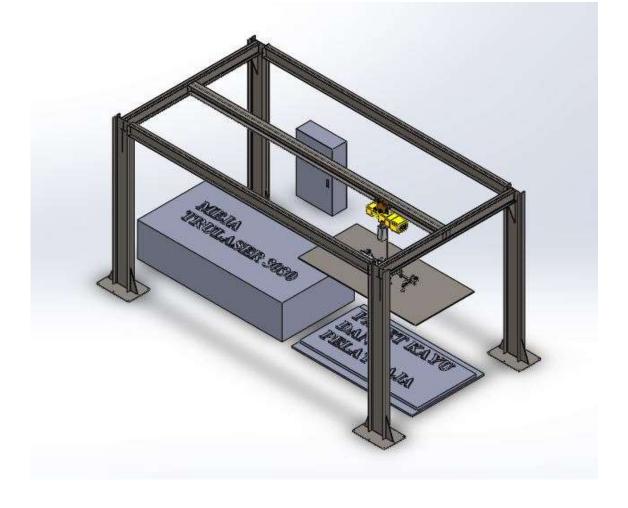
Mechanical Design of Steel Plate Transporting Machine (Isometry)
